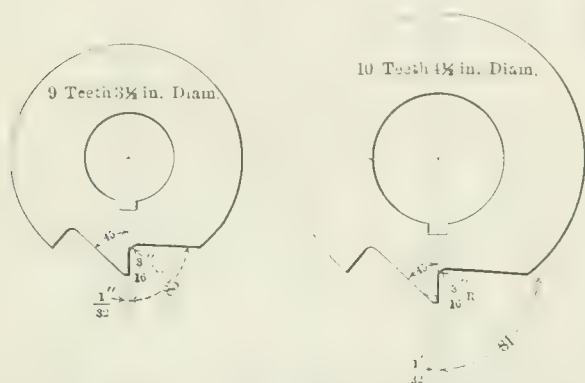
The Form of the Spiral Milling Cutters Now Used by the Cincinnati Milling Machine Company, Cincinnati, Ohio.
